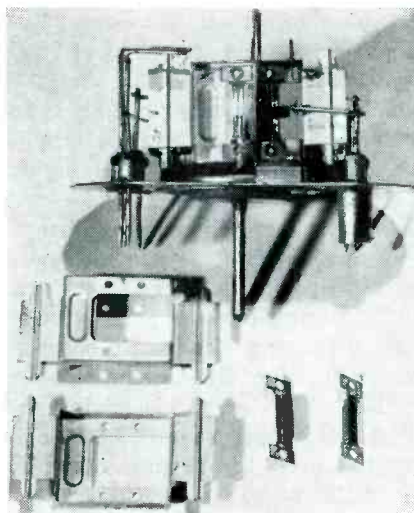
Internal structure, frame stampings and deflection plates of experimental beam-deflection tube
